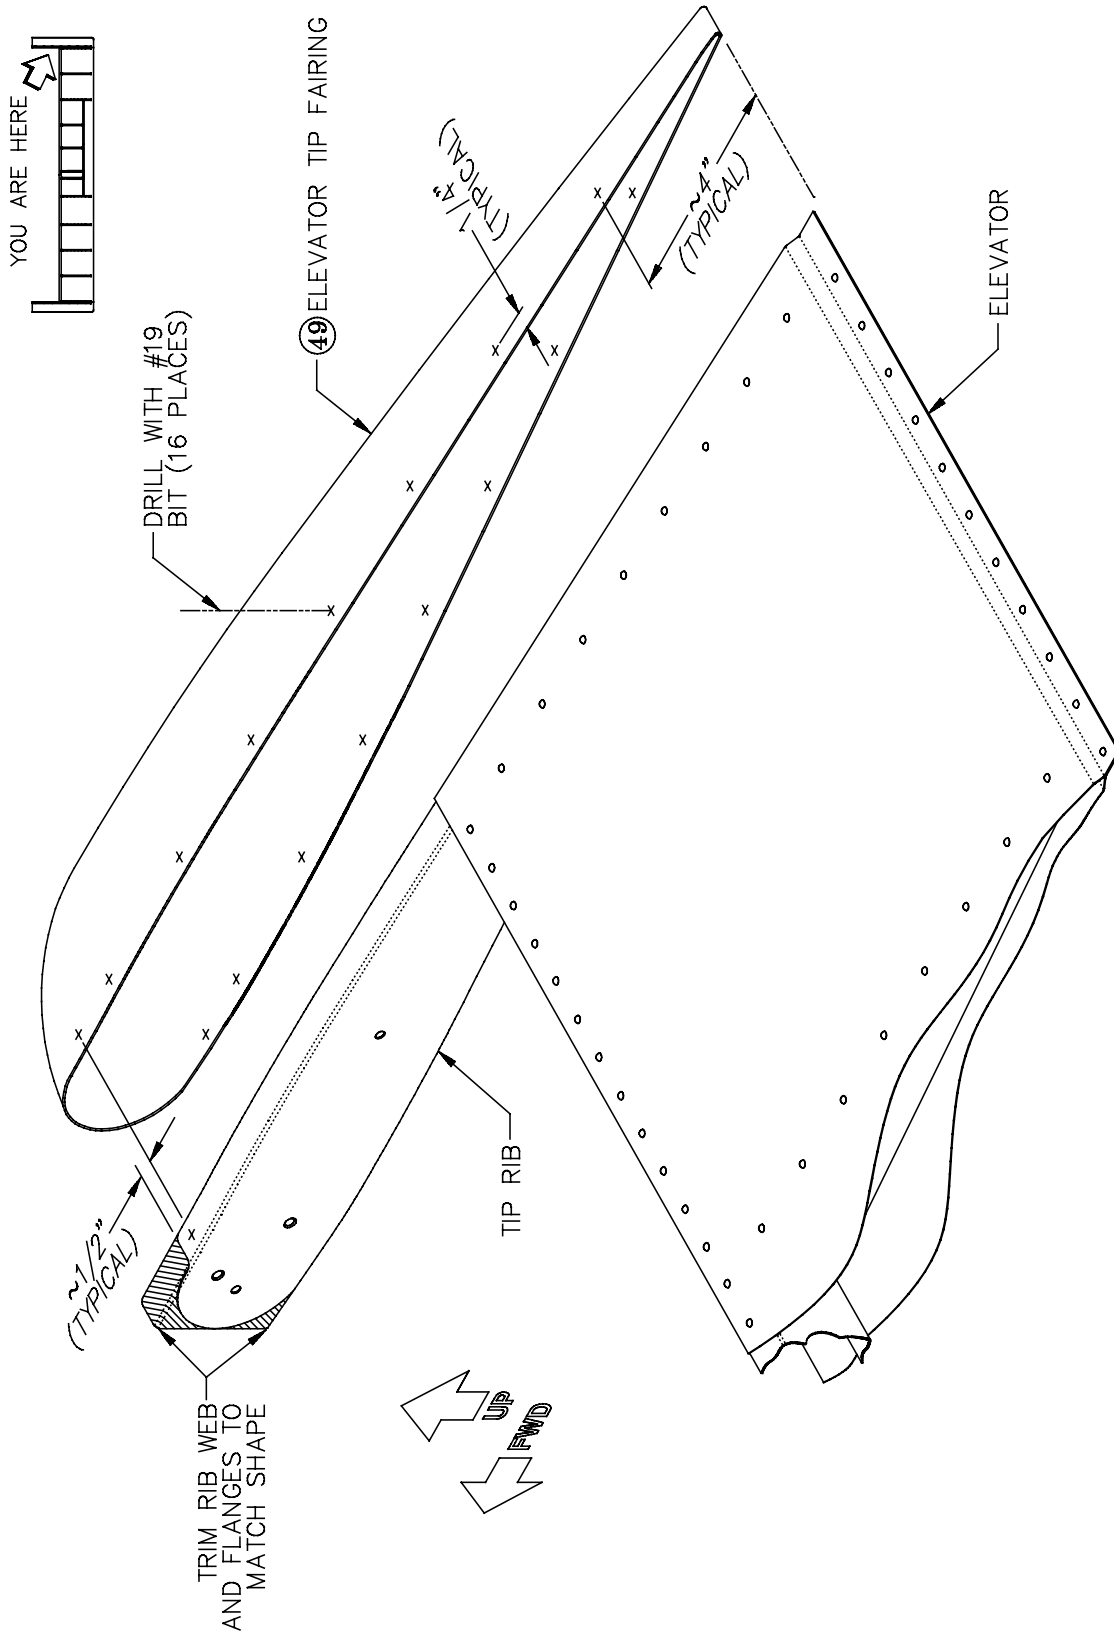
Positioning and Drilling the Elevator Tip Fairings
